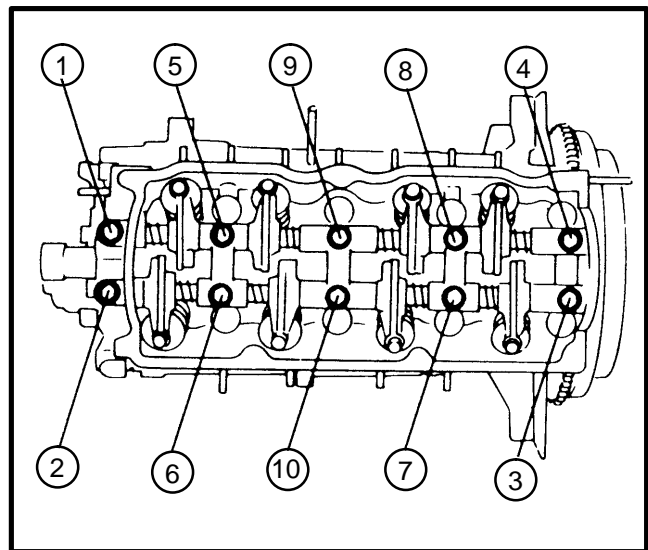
SEQUENCE FOR REMOVAL OF THE ROCKER ASSEMBLY
